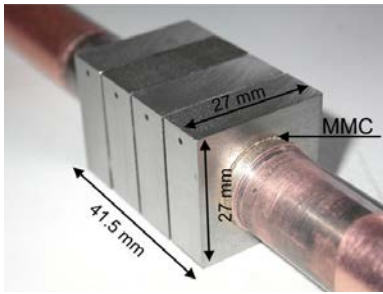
Water-cooled tungsten monoblock test mock-up with a W_f/Cu composite cooling tube [33].
